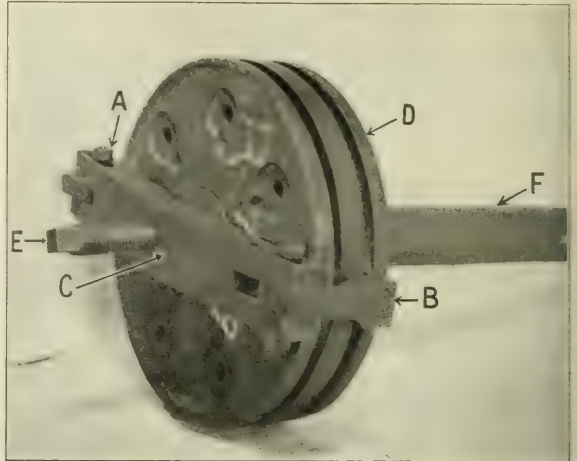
Tool for Removing Bull Ring from Piston Spider.
